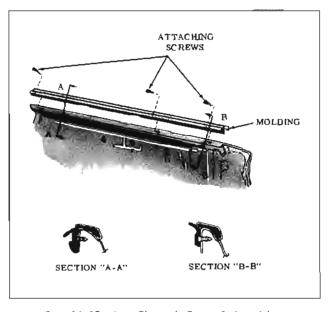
Run Channel Outer Strip with a Belt Reveal Molding
